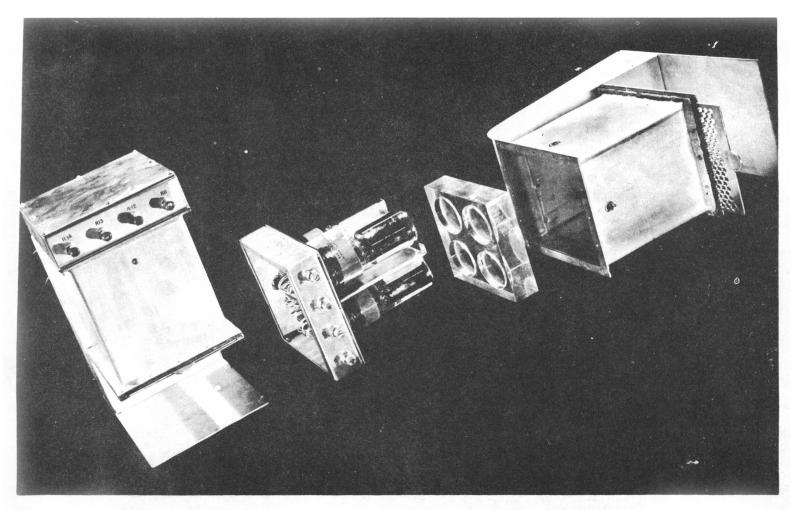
View of probe unit assembled for use as a hand contamination probe. (a) Assembled counter (b) Sockets and balancing potentiometers (c) Four photomultiplier tubes (d) Phosphor on lucite block and lucite block (e) Light tight aluminum box and 1/4 mil aluminum light tight window (f) Hand counter mounting frame (g) Guard screen.
